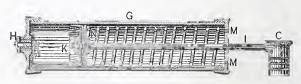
Plan View of the Shaw Door Check and Spring.
